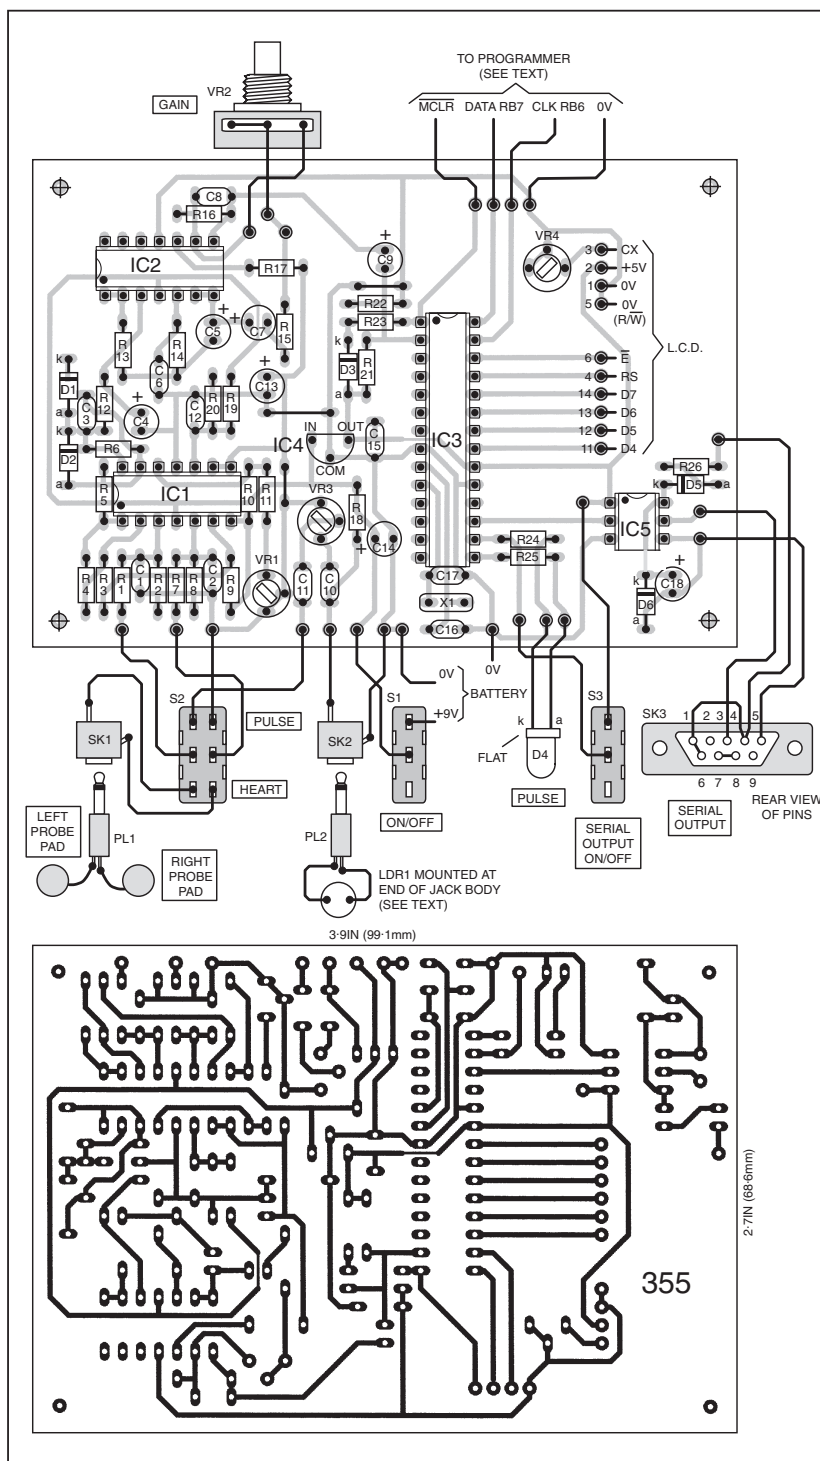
Printed circuit board component layout and full-size master track pattern, plus off-board connection details.
